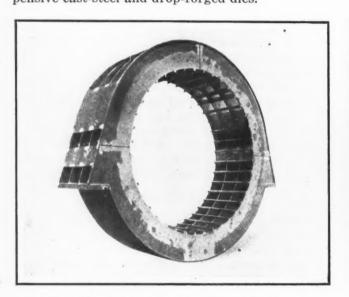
Welded Steel Frame, 18 Feet in Diameter, for Synchronous Condenser
